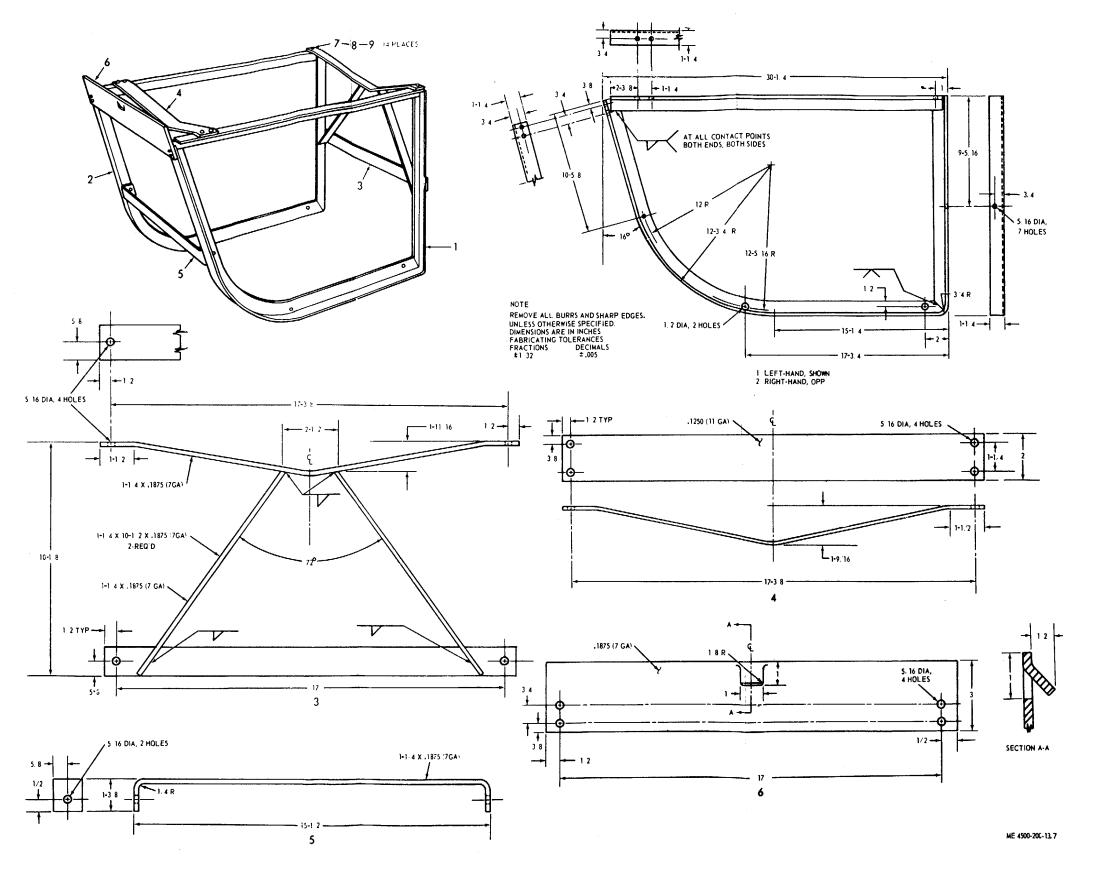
Fabrication and assembly of 55-gallon drum stand, style C.
